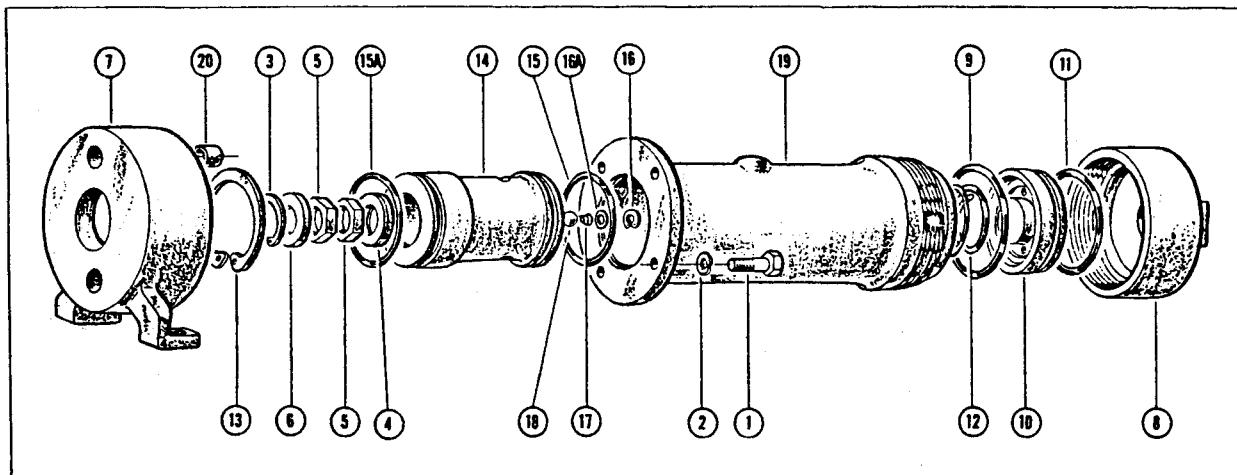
Exploded View, 87-84-1 Master Cylinder Assembly
